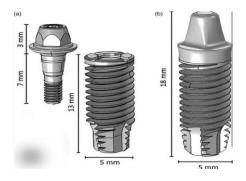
(a) Screw and implant body (b) Implant body with abutment dimensions
